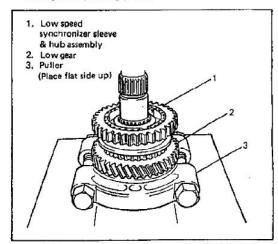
A-50 Removing Low Speed Sleeve & Hub
